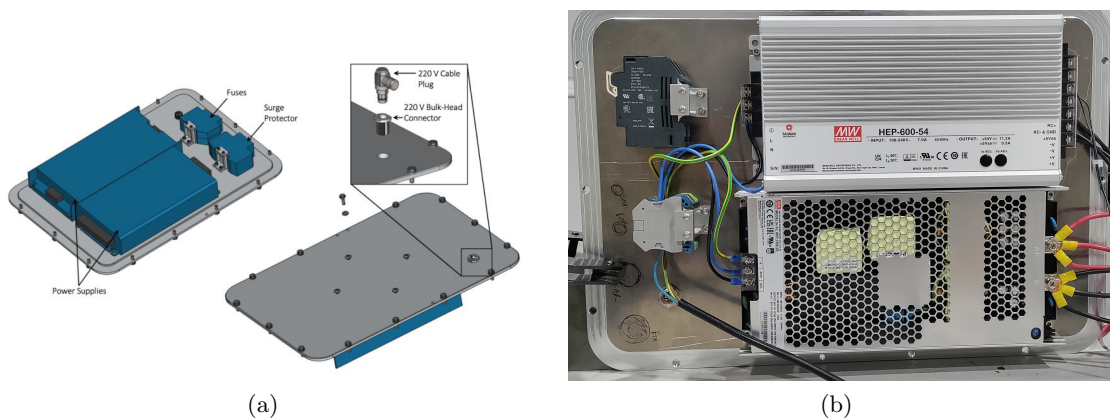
Power panel assembly, CAD overview (a) [29] and picture (b).
